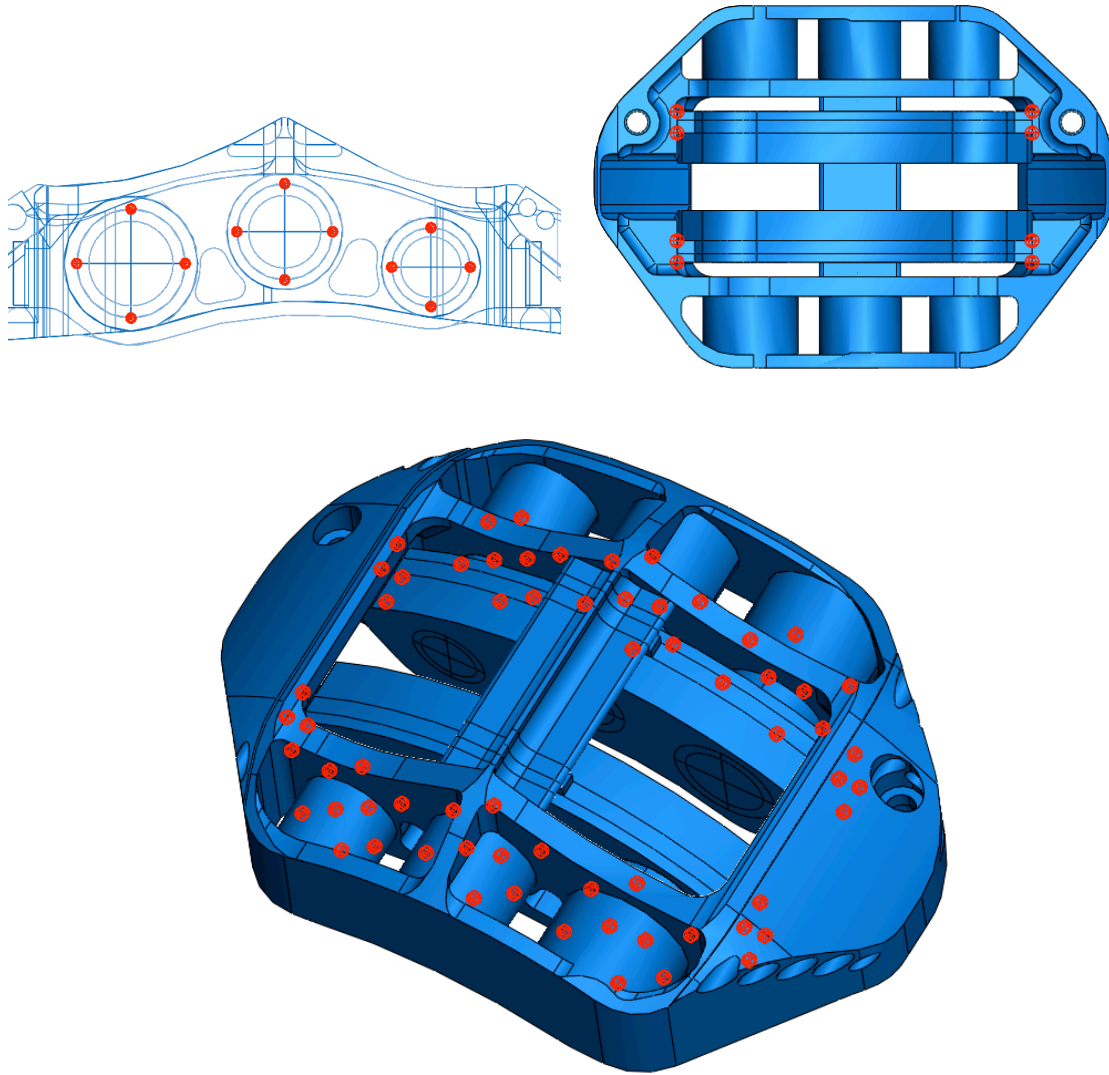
Spring elements used to stabilise the components within the brake assembly
